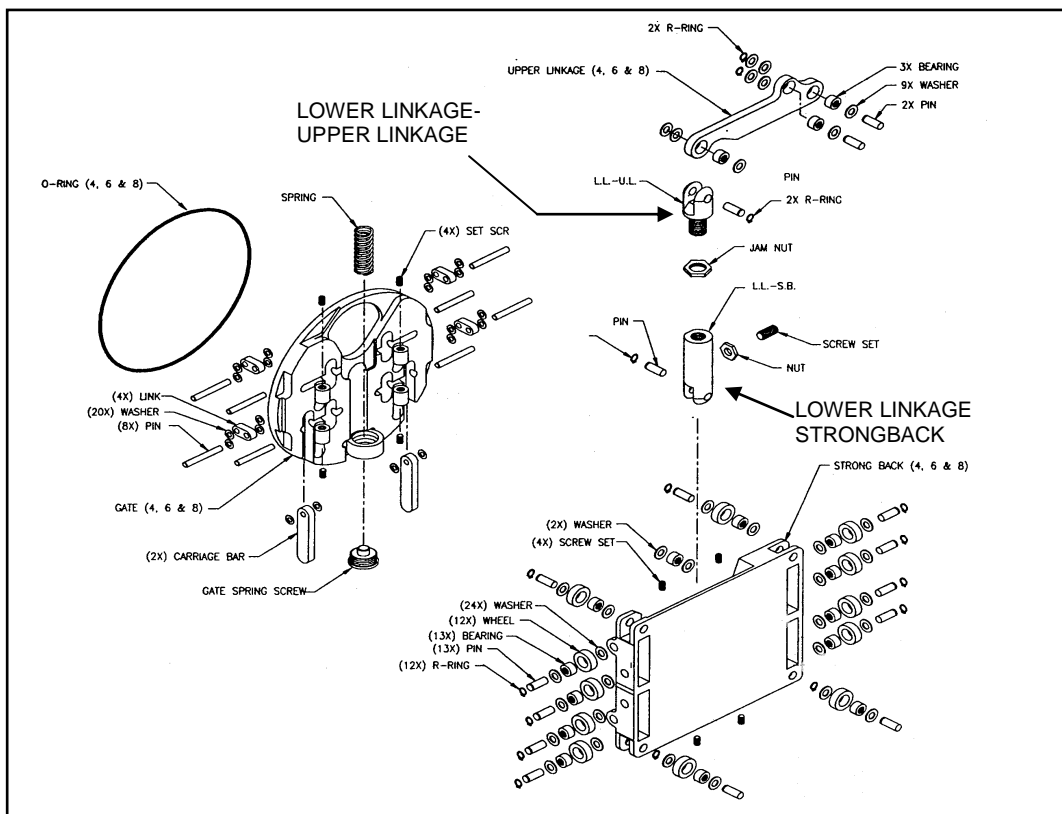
STRONGBACK AND GATE ASSYS DRAWING
